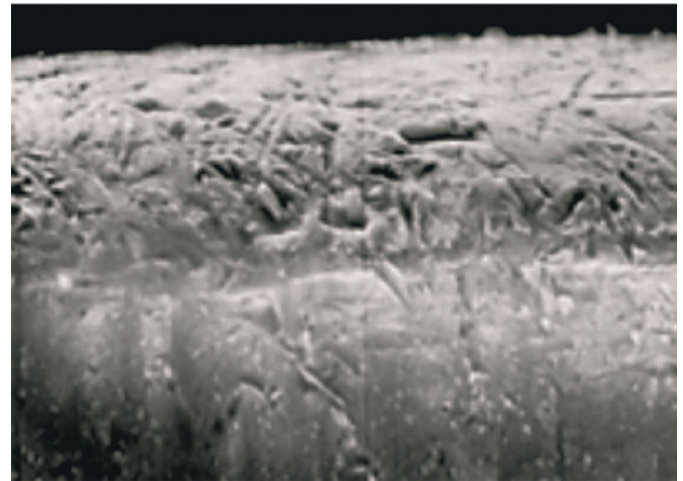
Cutting edge from the flank side (M2+TiN after 500 000 cuts; x500 zoom; $L_z=8\%$)
